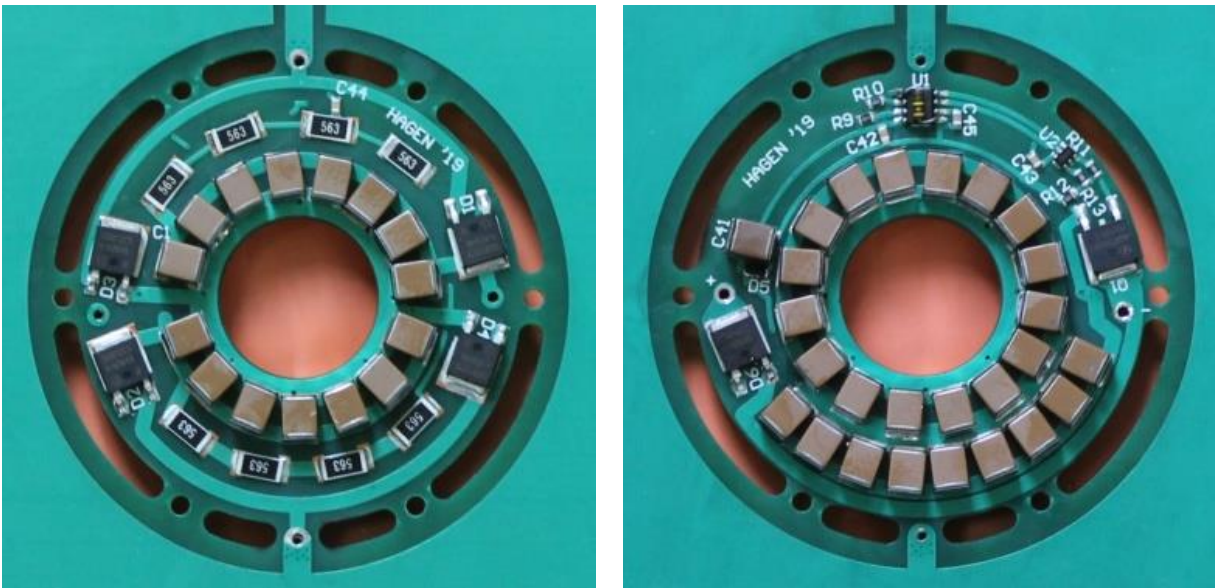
Printed circuit board coupler rotor, with electronic components populated.
